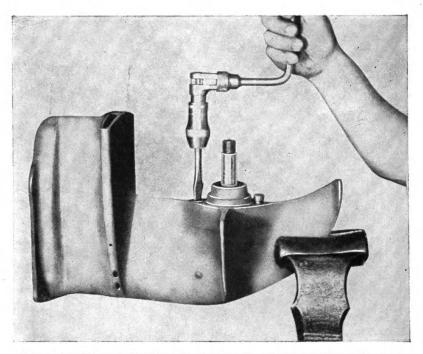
Unscrewing two screws preparatory to removing gearhousing cap.
